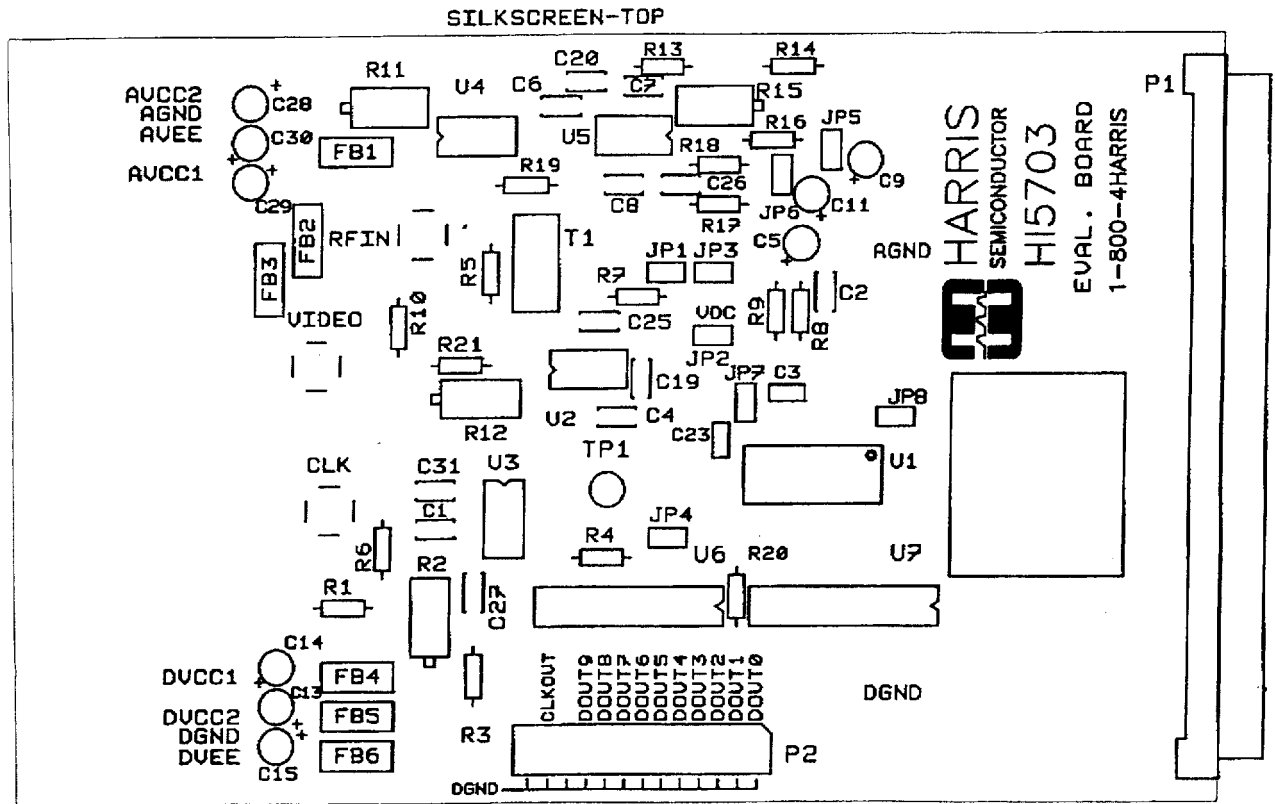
HI5703EVAL EVALUATION BOARD PARTS LAYOUT
